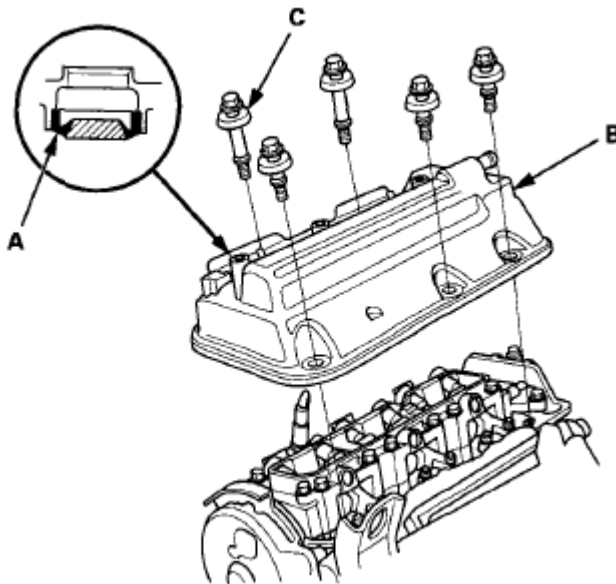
Identifying Spark Plug Seals, Cylinder Head Cover And Cover Washers
